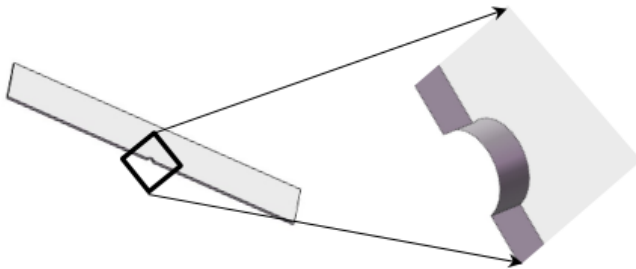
Corrosion fatigue crack initiation specimen with a semicircular notch.
